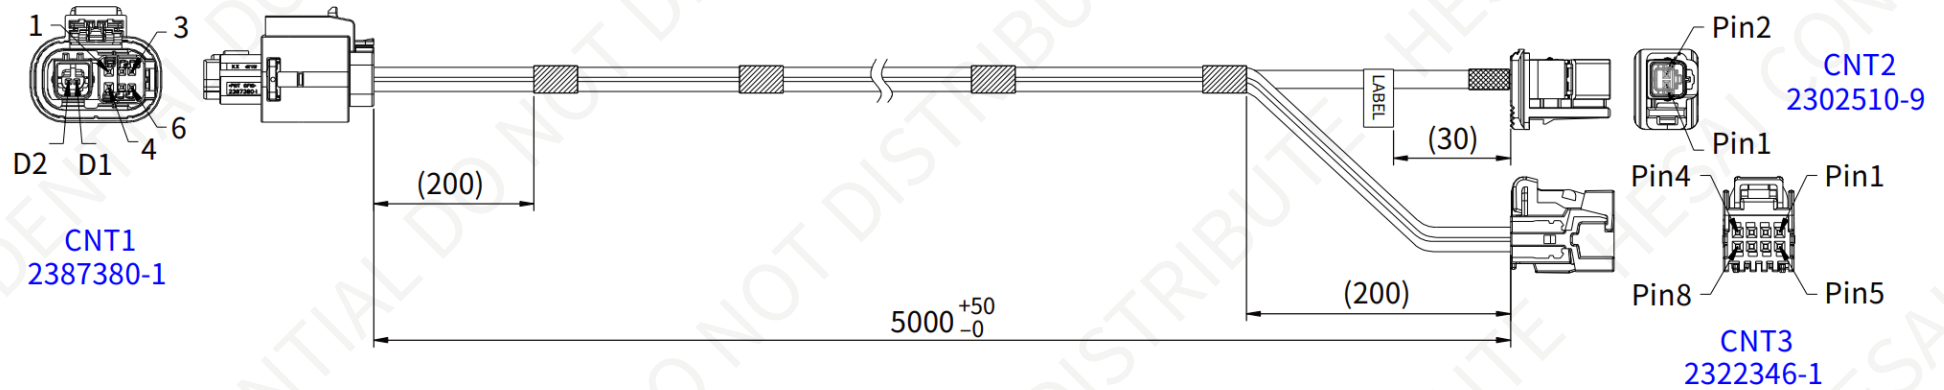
Cable between Lidar and Connection Box (unit: mm)
